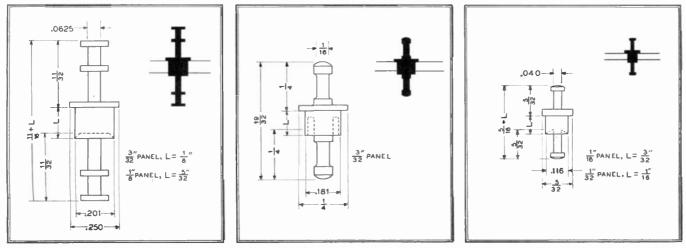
DIMENSION DRAWINGS AND ACTUAL-SIZE SILHOUETTES OF THREE STANDARD TYPES OF DOUBLE-ENDED TURRET LUGS
